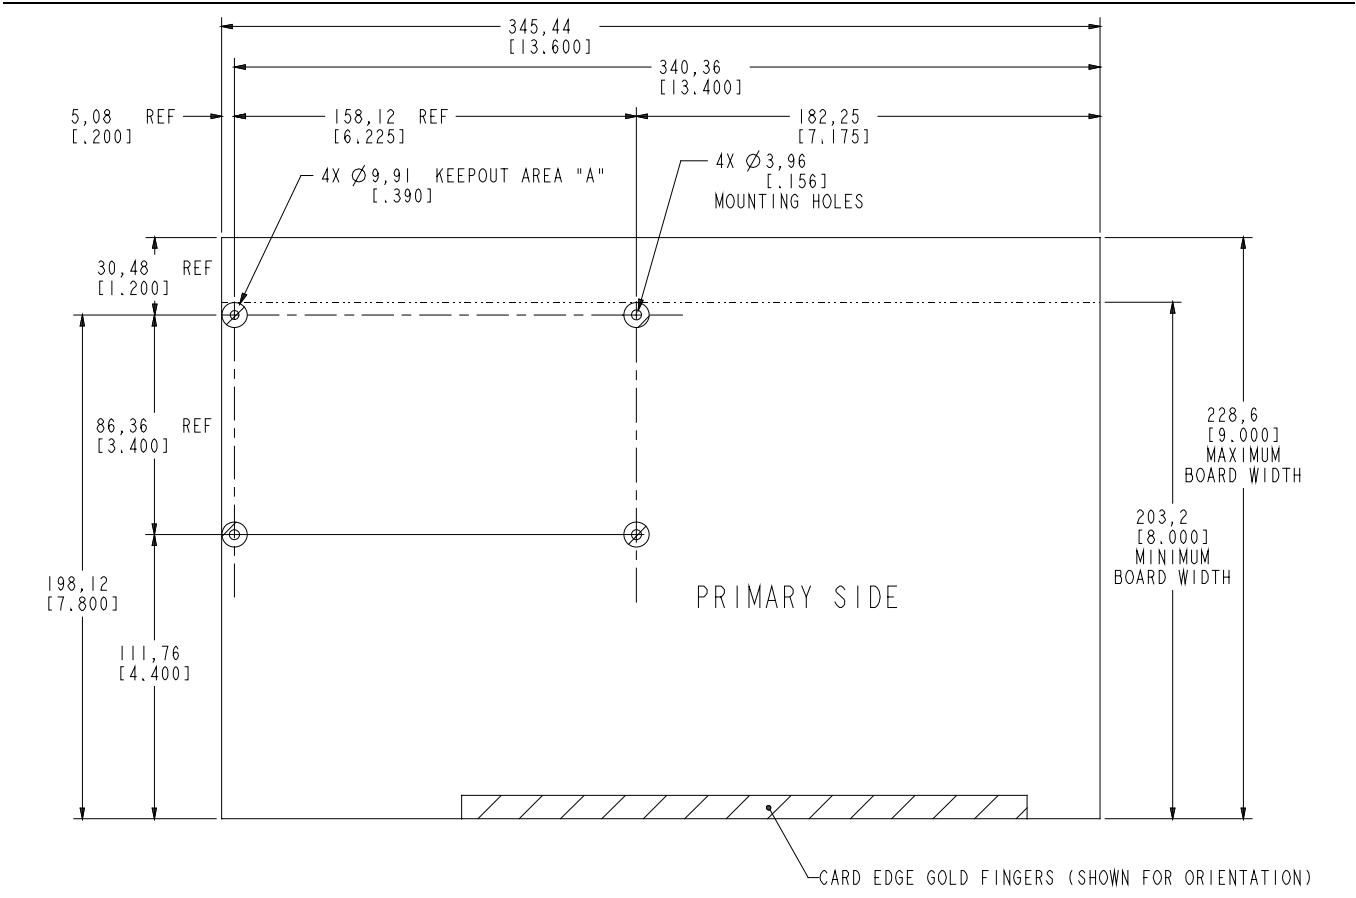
NLX Motherboard Dimensions—13.6" Primary Side
